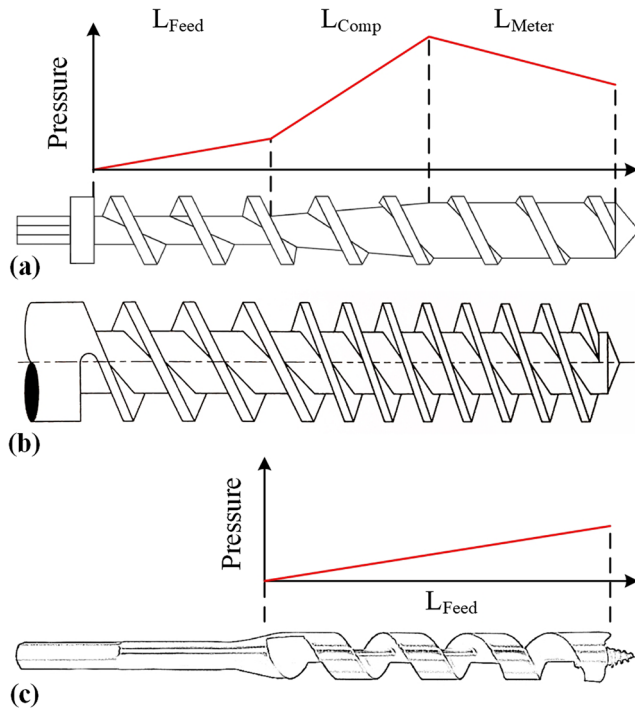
Comparison of three extruder screw designs. A common three-section screw with its pressure profile (a), rubber extrusion screw (b), and an auger drill bit with its pressure profile (c)
